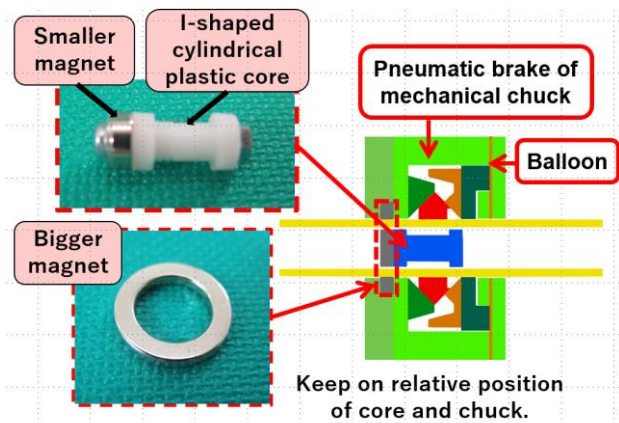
Schematic diagram of inner construction and view of magnetic core type chuck.
